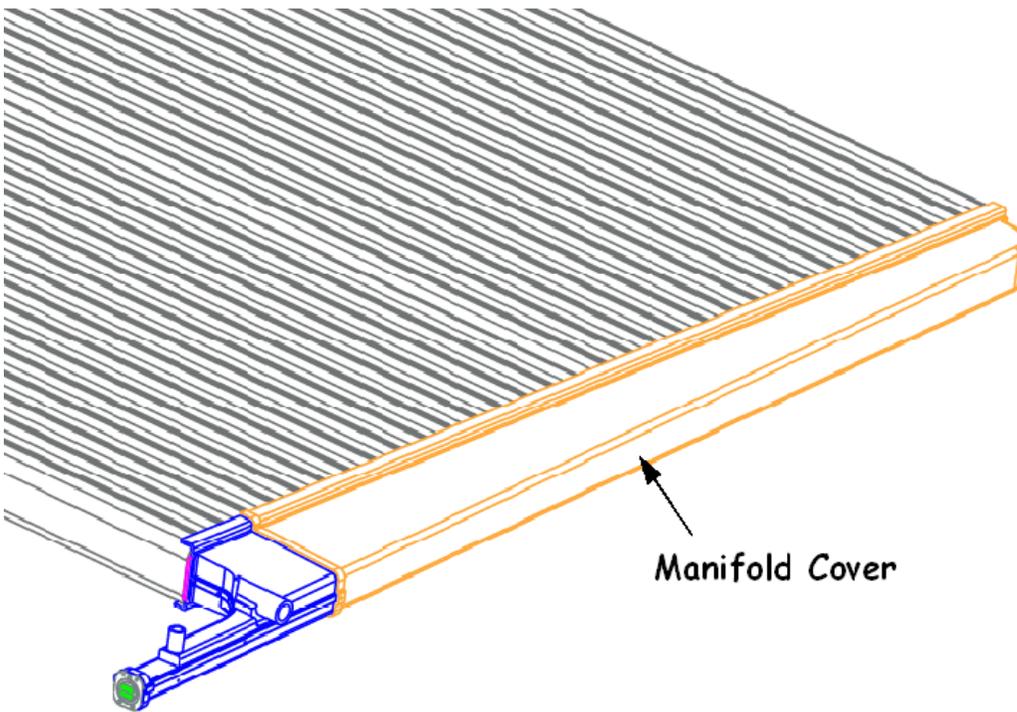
Glue manifold cover to the extrusion and snout.
